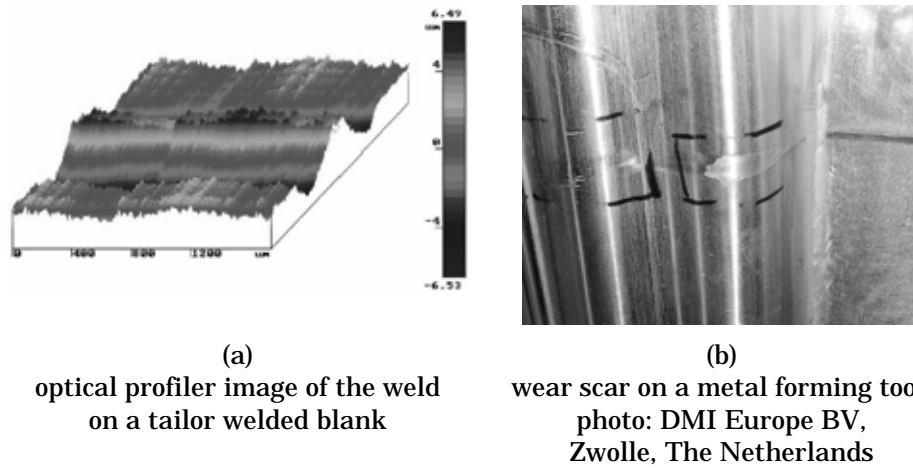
Wear due to the processing of tailor welded blanks.
